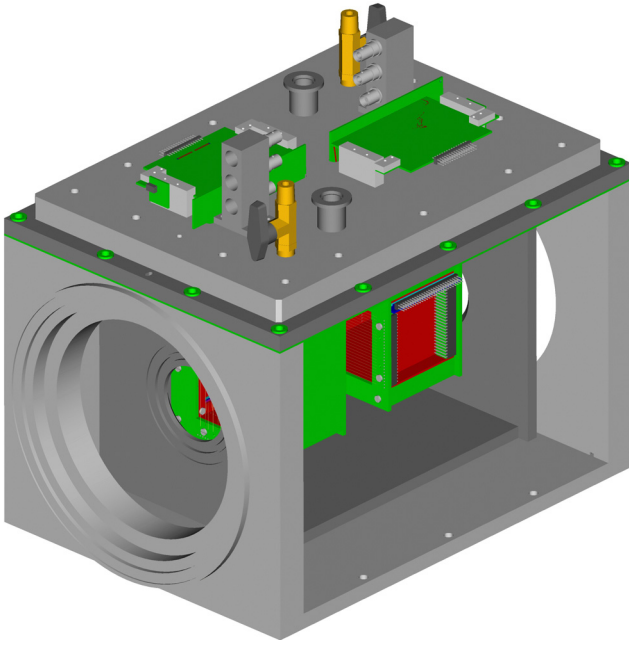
A 3D rendering of the time expansion chamber (TEC) designed and built for the TWIST experiment (Expt. 614). The TEC is now undergoing bench tests and will soon be installed.
